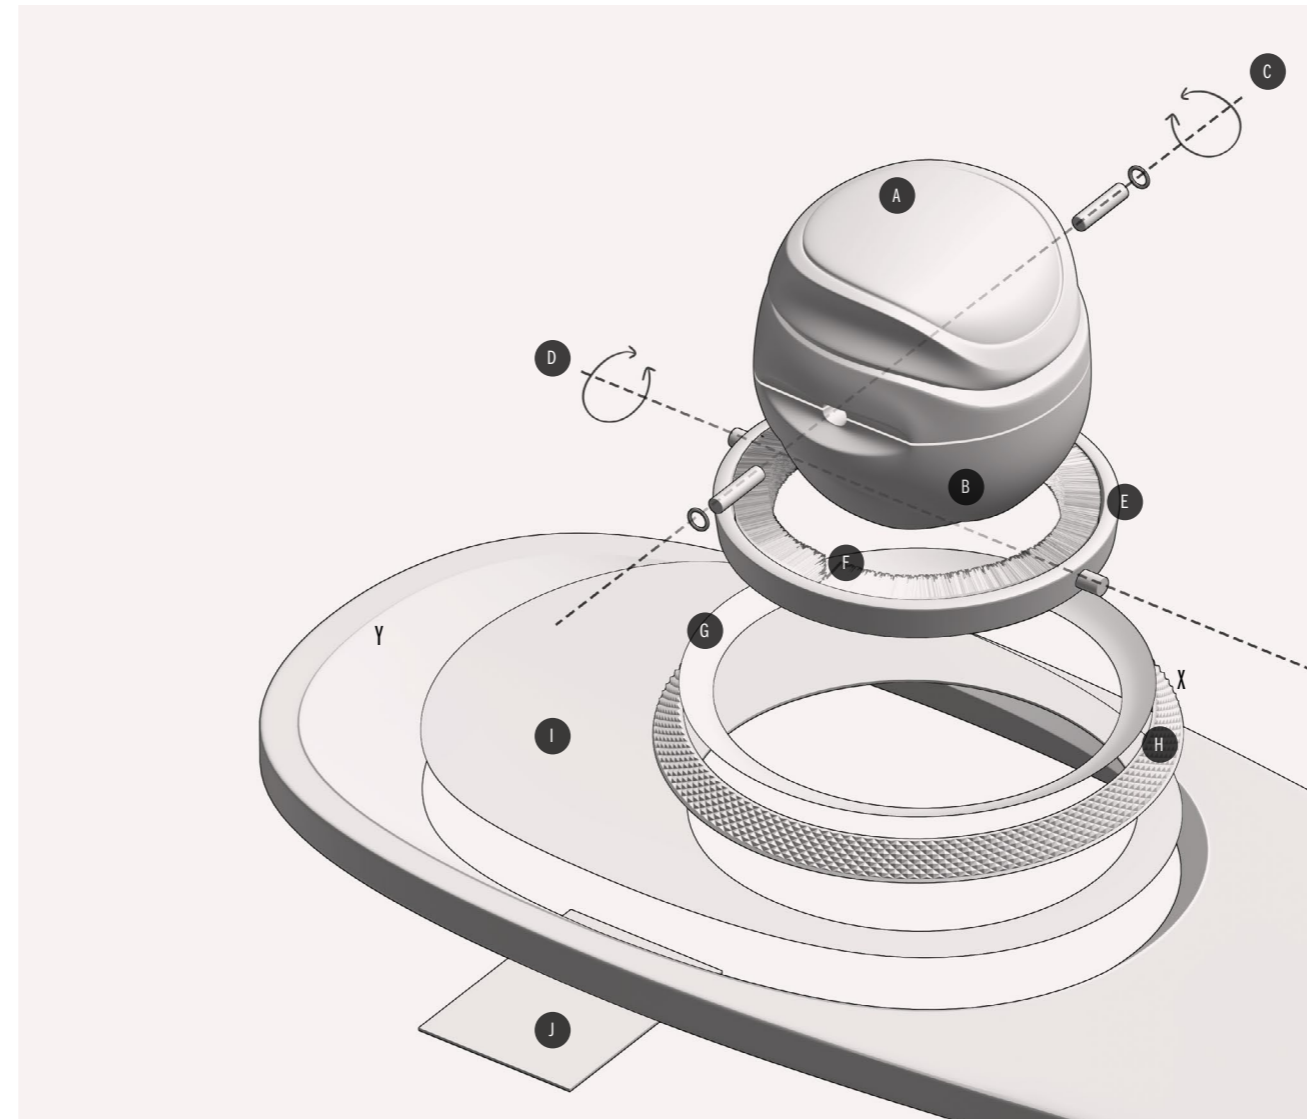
Exploded view of the complete Navigation Sphere assembly.
